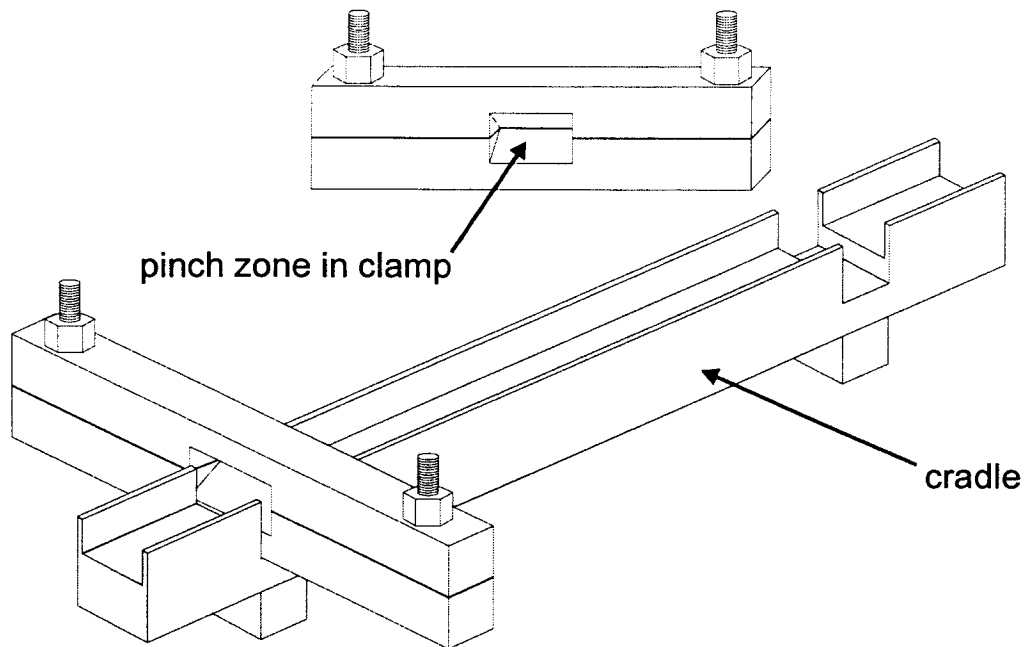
Pinch tool and cradle system used to create a cold weld seal for copper tube water samples.
